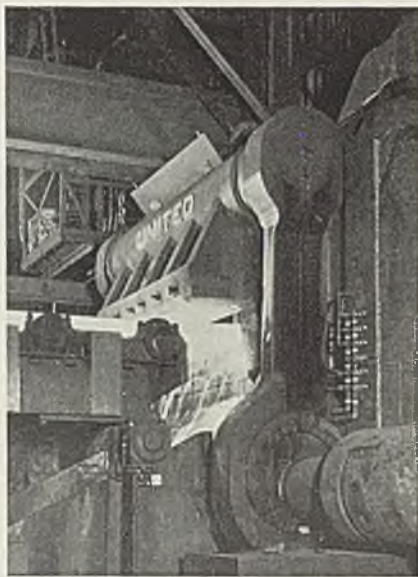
New down-and-up-cut shear just ahead of holding furnaces
